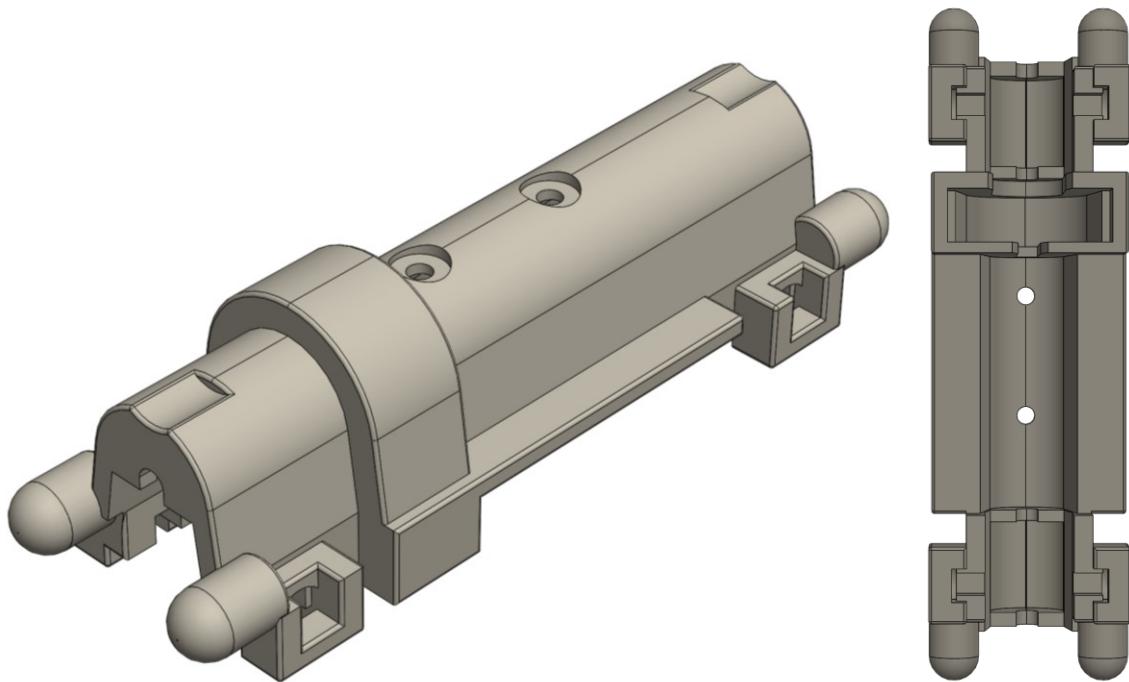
CAD of the Drivetrain Body, Bottom view is shown on the right, which houses both the gears and all the drive shafts
